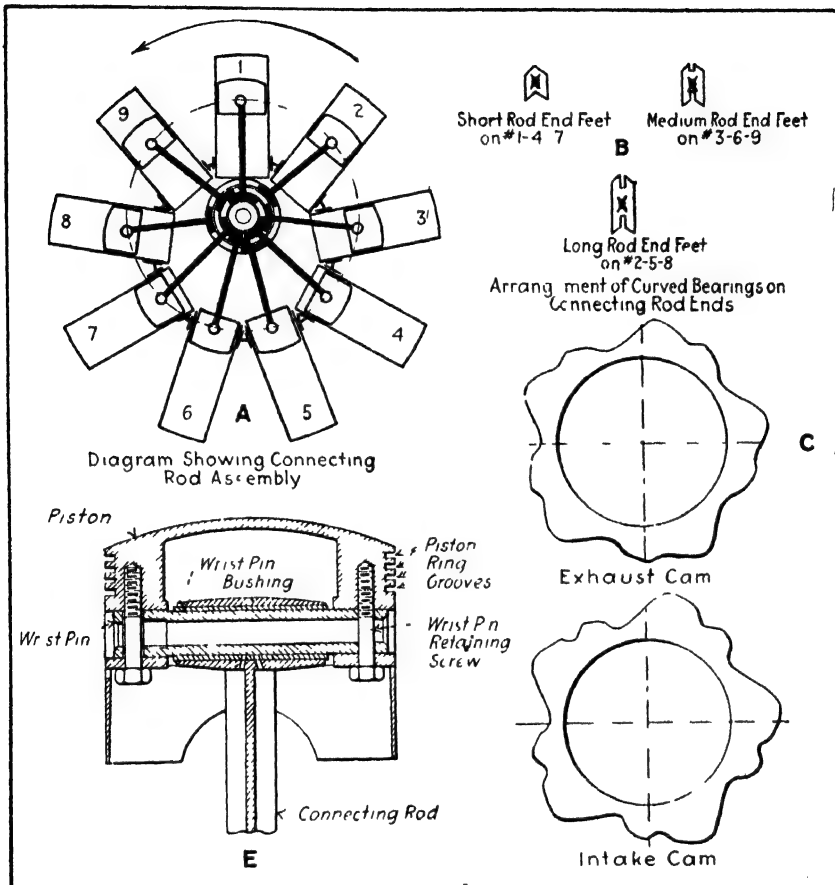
View Showing the LeRhone Valve Action and Connecting Rod Big End Arrangement.
